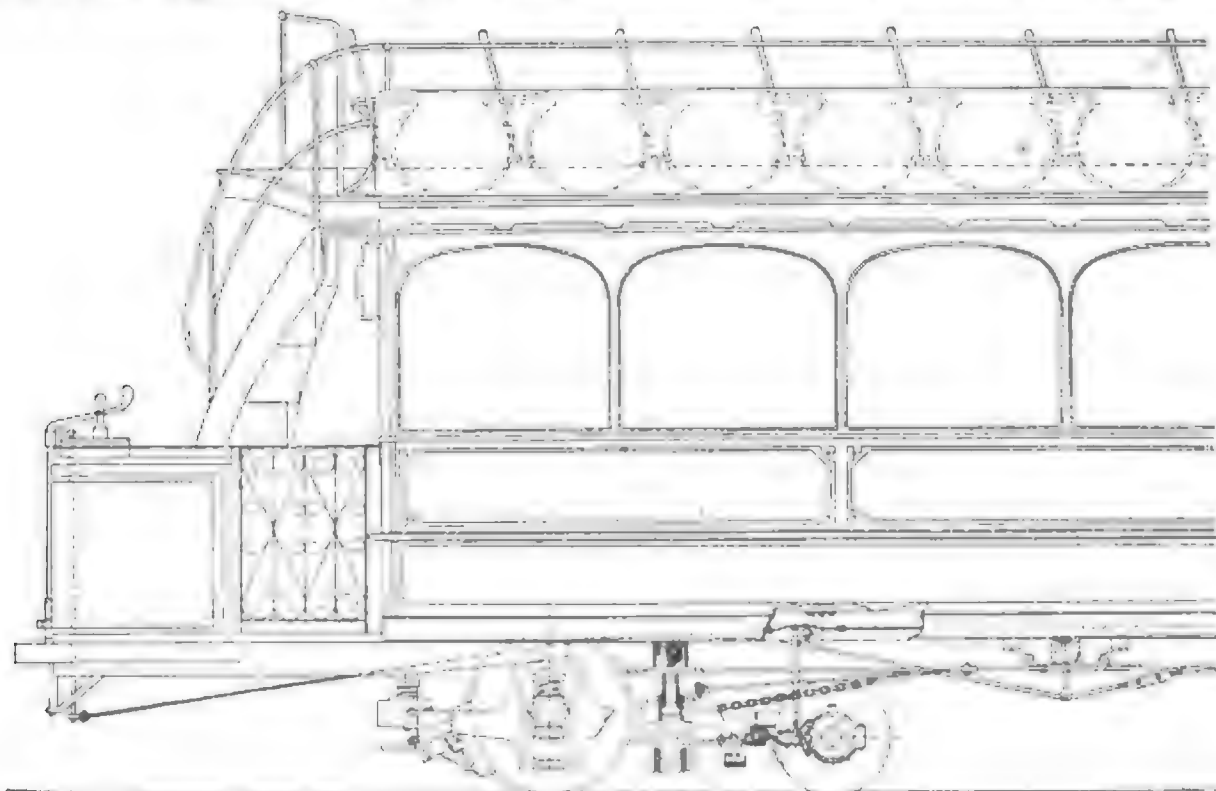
CAR FITTED WITH THE PRICE FRICTION BRAKE.
